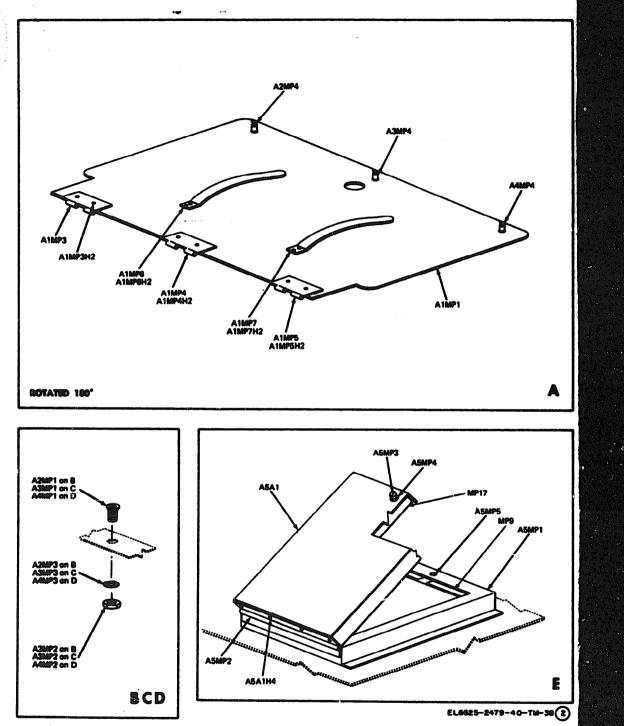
(). Case cover assembly 2A2, parts location (part 2 of 2).
